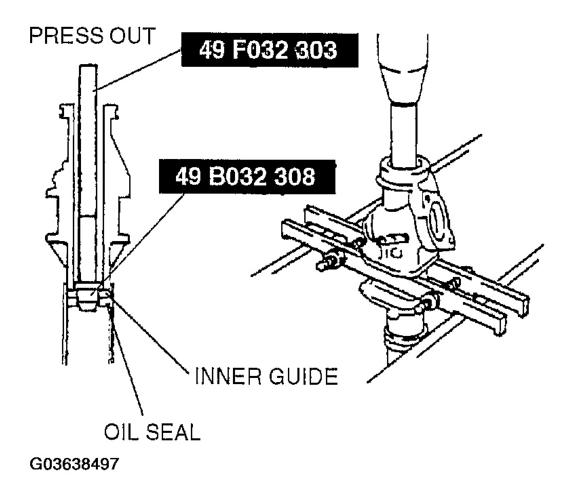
Pressing Out Oil Seal And Inner Guide Courtesy of MAZDA MOTORS CORP.
